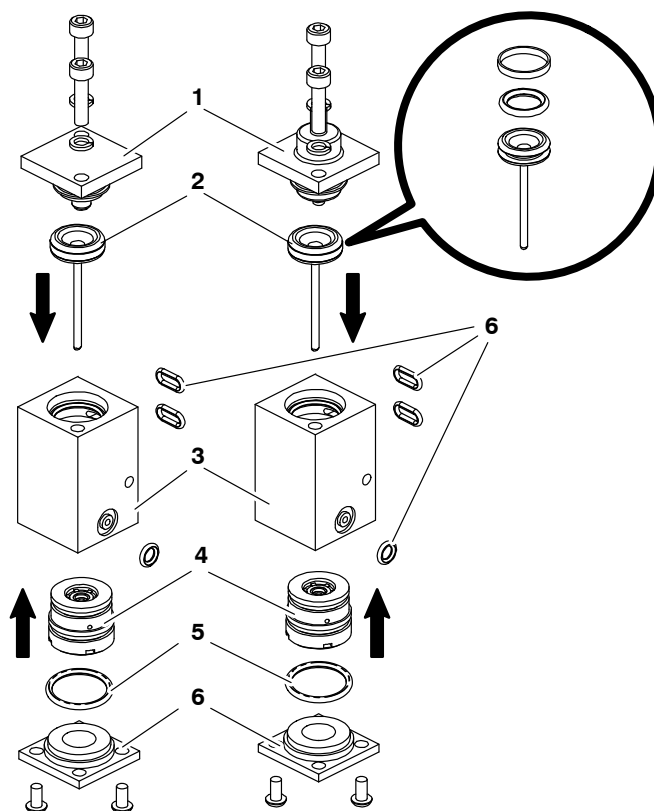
Module assembly (left-side image: fixed module; right-side image: adjustable module)
